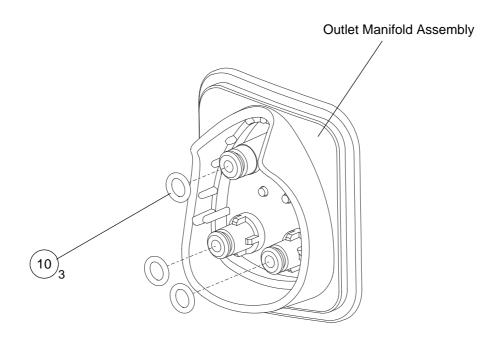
Replacing the O-Rings on the Outlet Manifold Assembly
